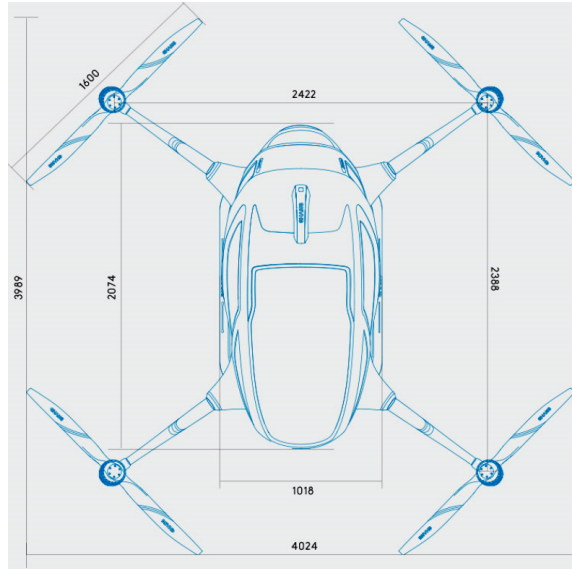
Top view of EHang 184, all dimensions in mm¹⁵
